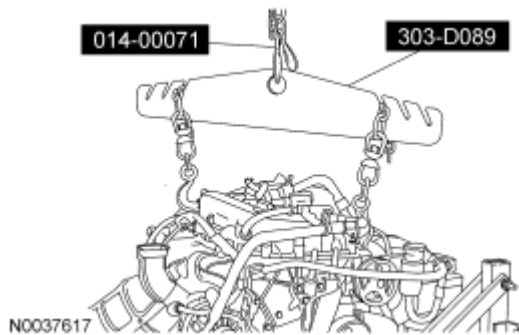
Identifying Special Tools (014-00071, 303-D089)
